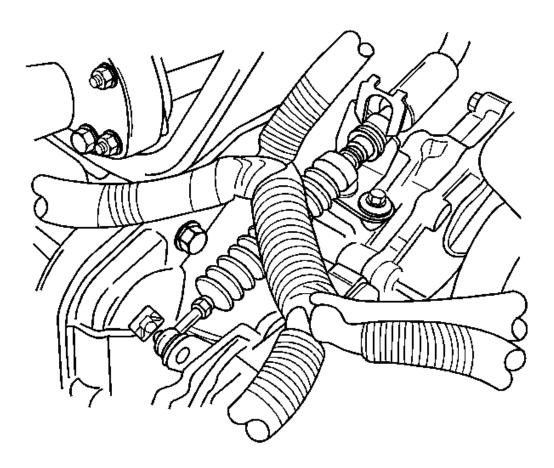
View Of Transmission Oil Level Indicator Courtesy of GENERAL MOTORS COMPANY
